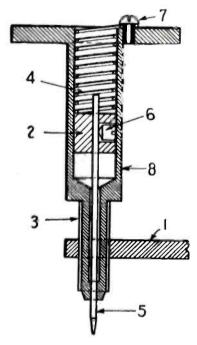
Details of contact point holder. No. 1 shows support; 2, a sliding bolt; 3, brass tube; 4, spiral spring; 5, contact pin; 6 and 7, set screws for adjustments.
